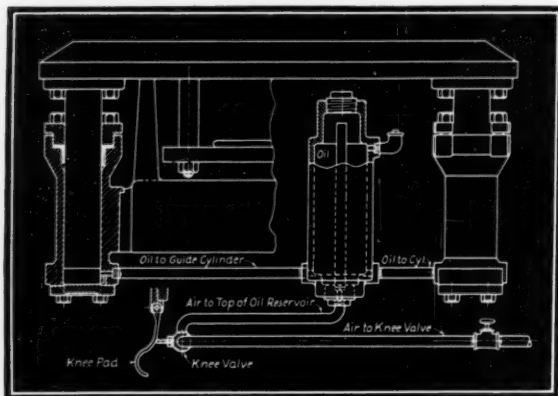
Combination compressed air and oil cylinder mechanism employed to provide easily controllable and smooth feed
